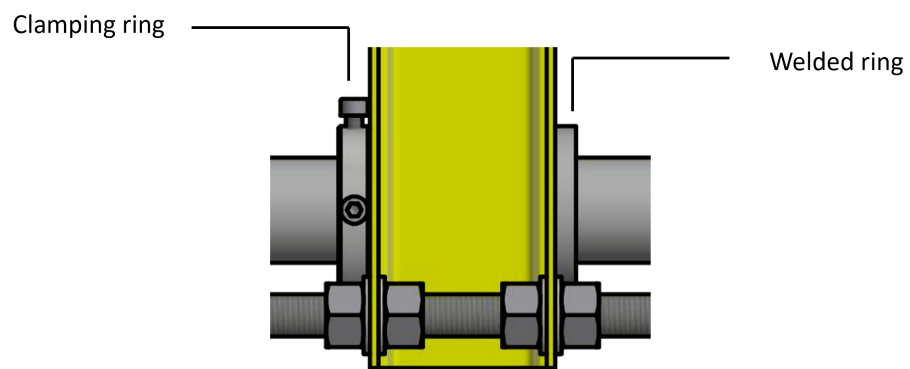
Welded ring and clamped ring holding the tube into place during an experiment whilst allowing an easy removal
